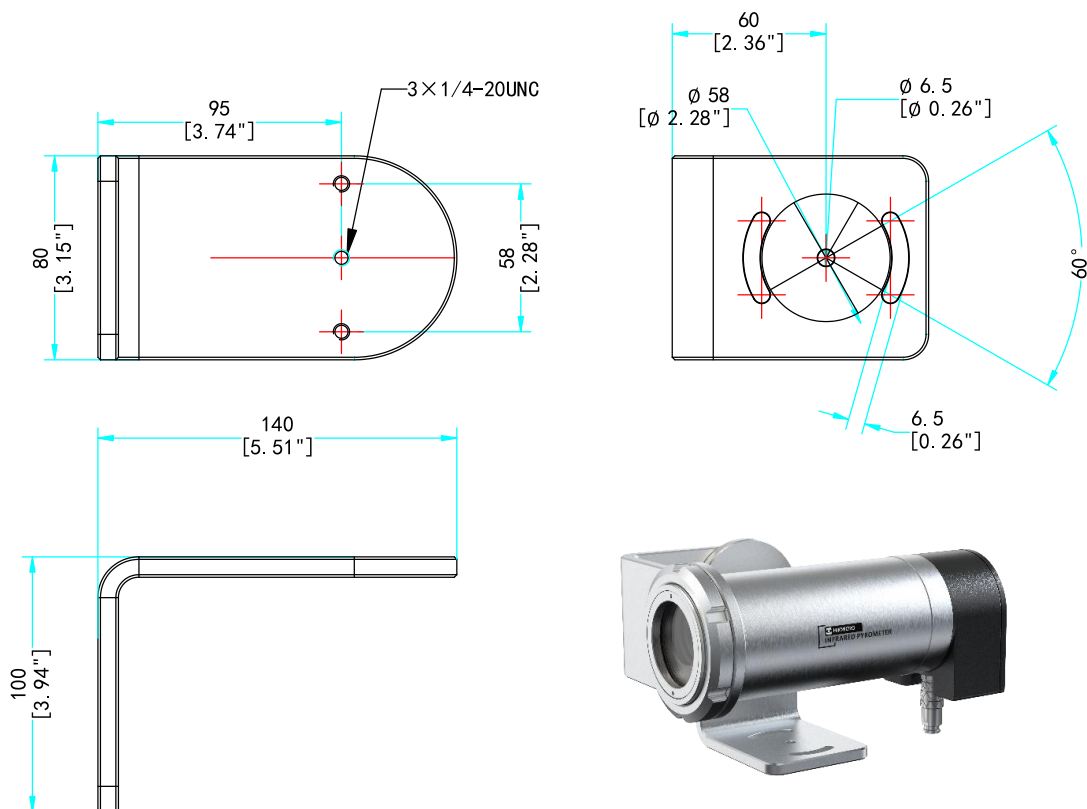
Dimension of Adjustable Bracket (Unit: mm [inch])
